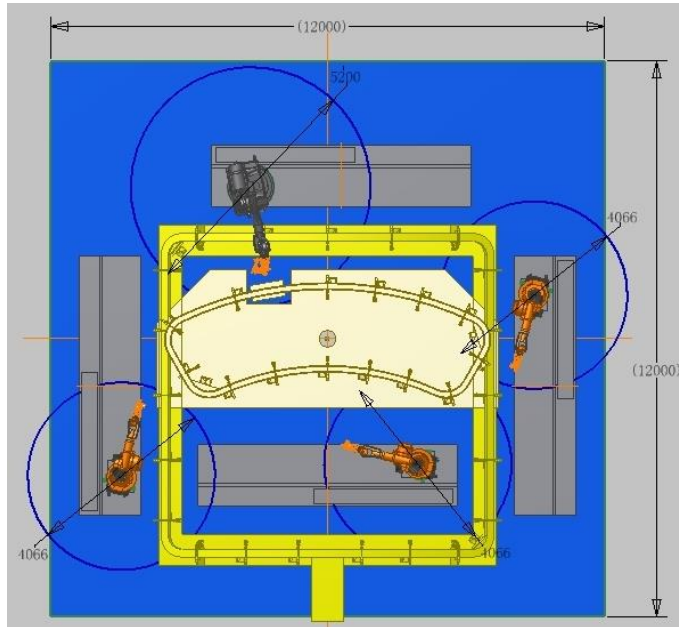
Overview of Scheme 2 for CC case laser welding
